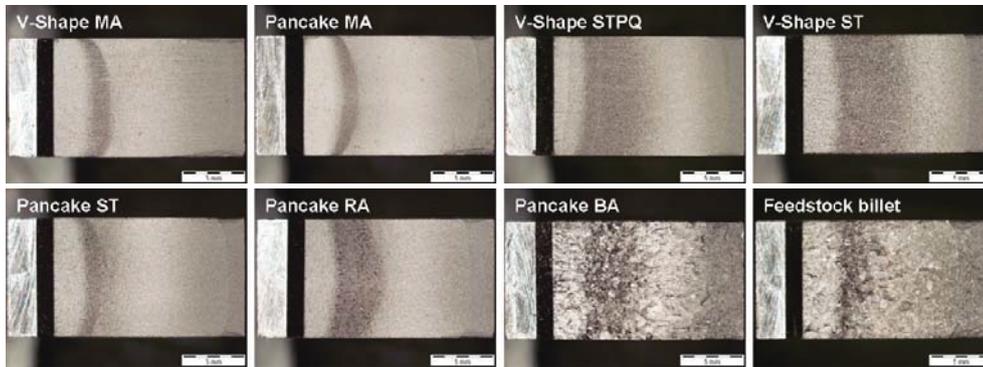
Fracture surfaces of SEB specimens tested with a stress ratio of zero
